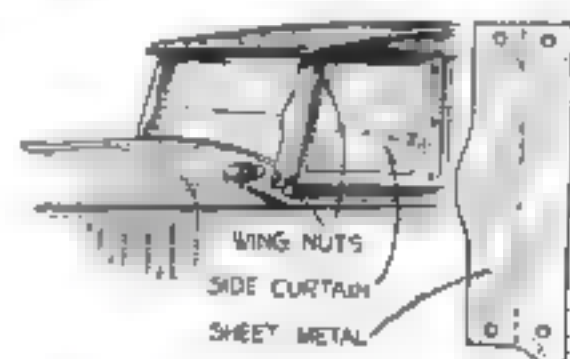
Shields of sheet aluminum bolted to the windshield help keep the car warm
